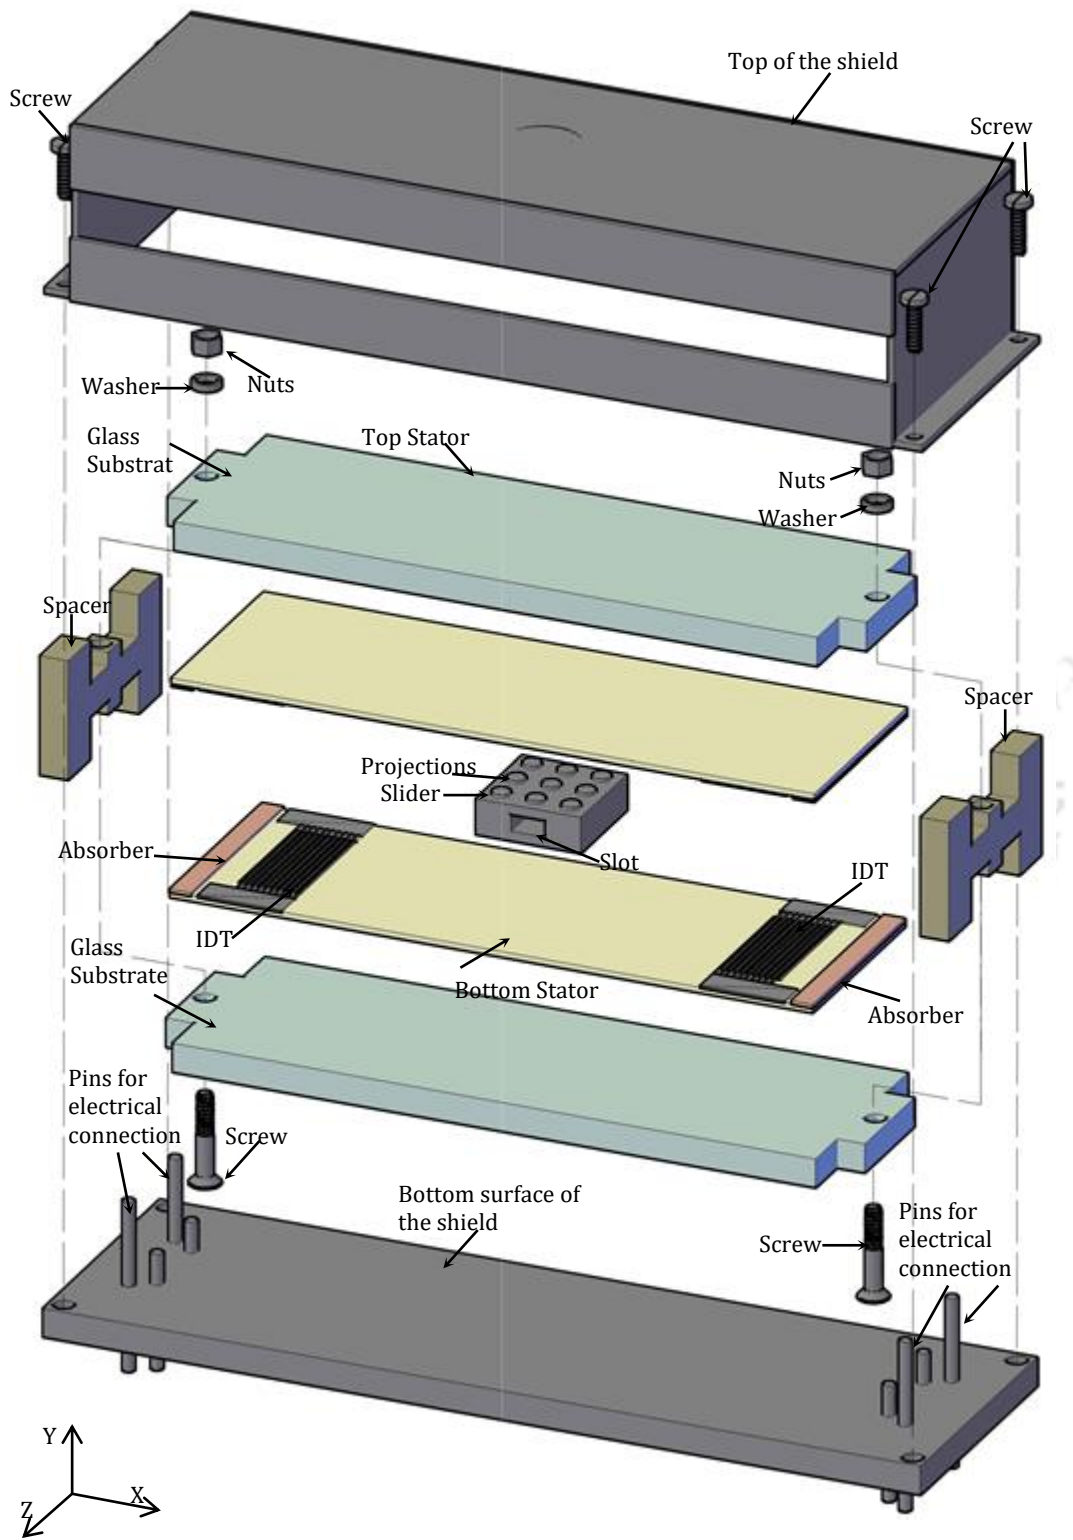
34: The exploded perspective of DFD SAW linear motor with the forward and backwards motion of the slider.
